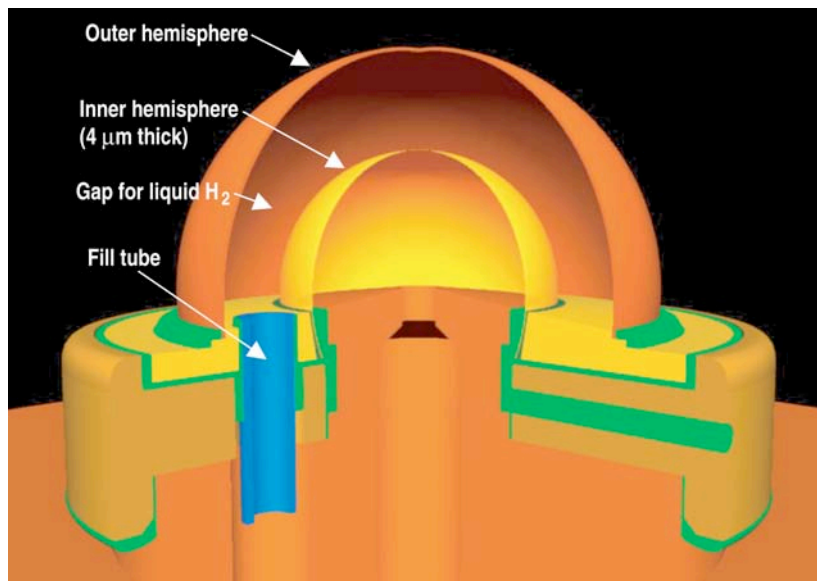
This CAD drawing shows the redesigned cryogenic fast igniter target. The larger fill tube was required to prevent clogging of the fill tube during assembly.
